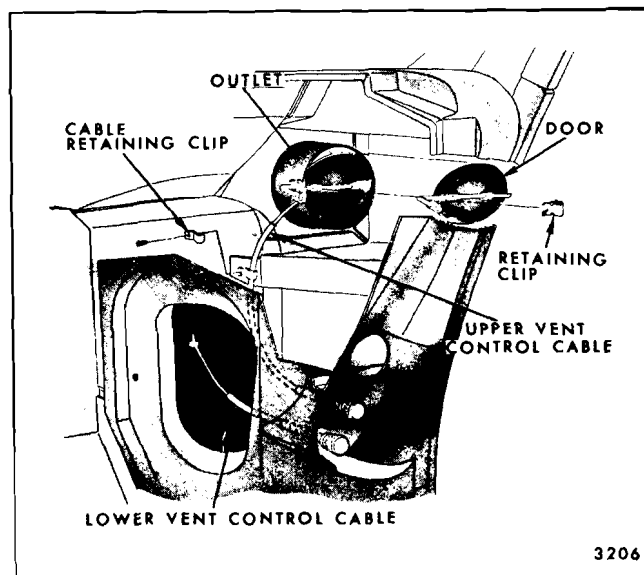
Shroud Center Duct Upper Air Outlet Door - "A & G" Styles
